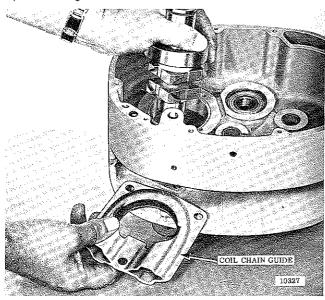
Chain Guide Being Removed From Frame as Sprocket Shaft is Lifted Out (Coil Chain Models)
